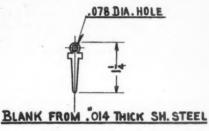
Drawing of blank produced by the die illustrated in Fig. 2.
